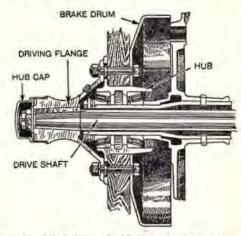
Mitchell rear wheel hub showing bearings, flange, and brake drum.
